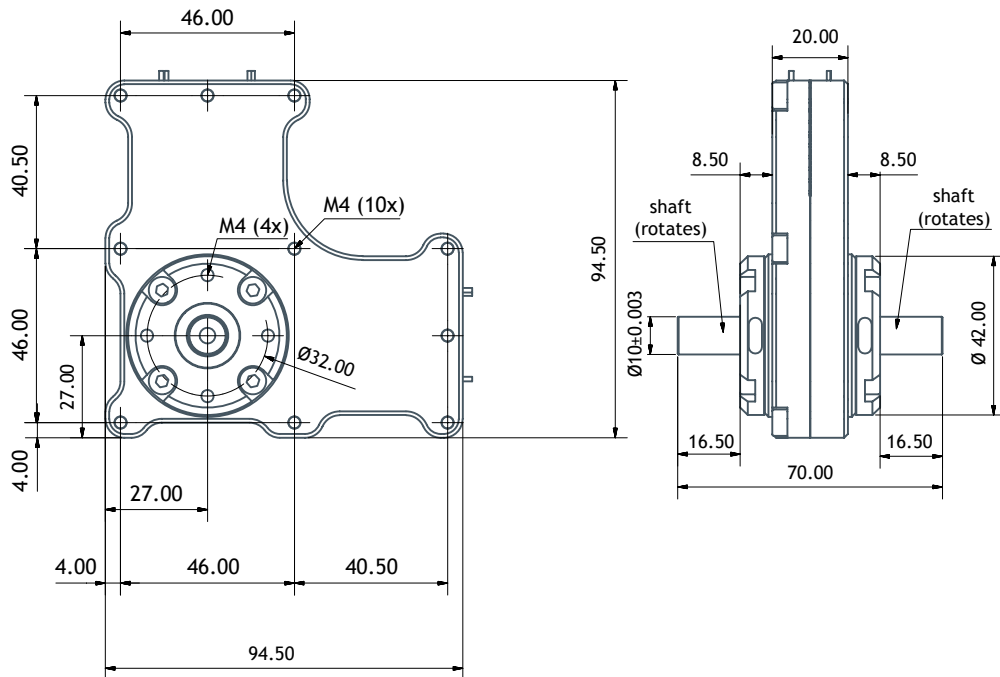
Figure D: Interface drawing of the PAD7200 prototype. Units in mm.
